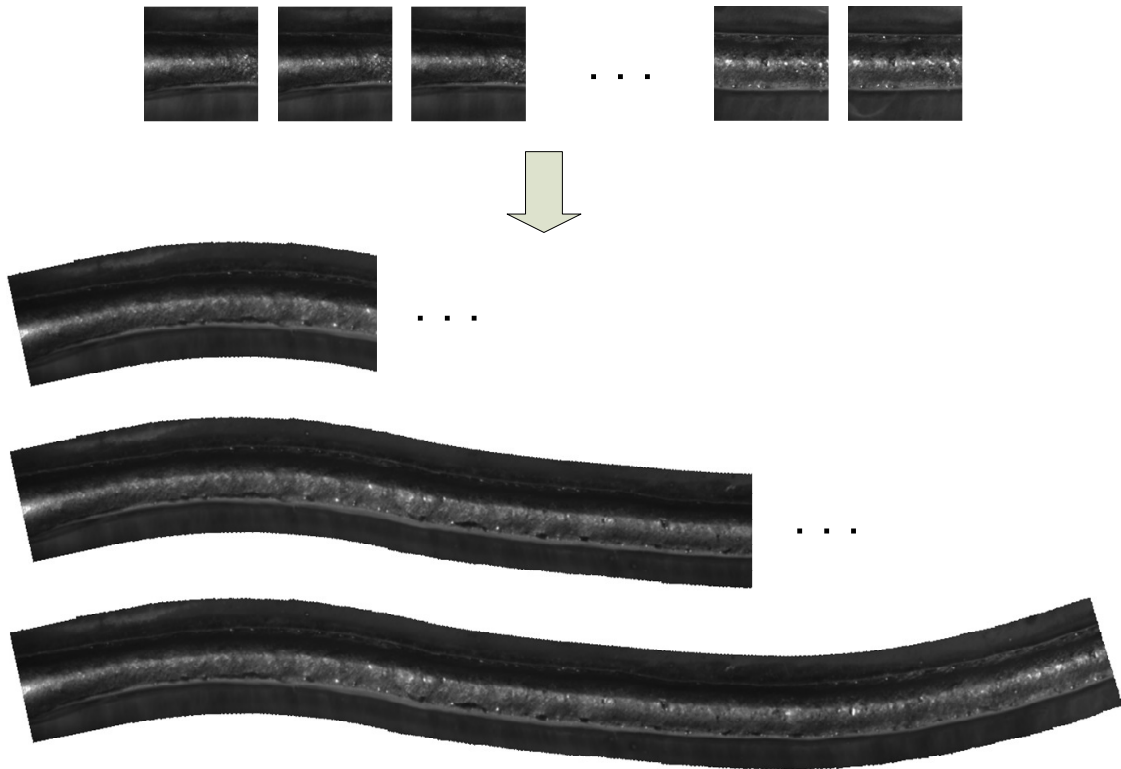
Weld seam, computed track and extracted patches. The weld seam is tracked in acquired frames. Based on the tracking data, rectified patches of the weld seam are extracted for each frame.
